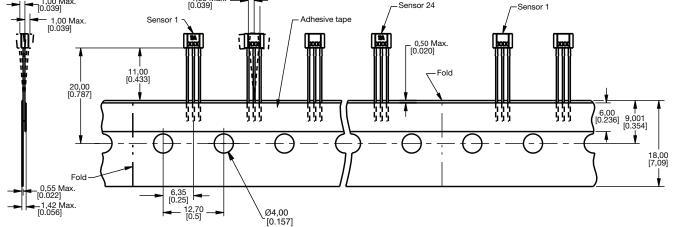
SS400 Series Flat TO-92-Style Mounting and Dimensional Drawings (For reference only: mm/[in].)
